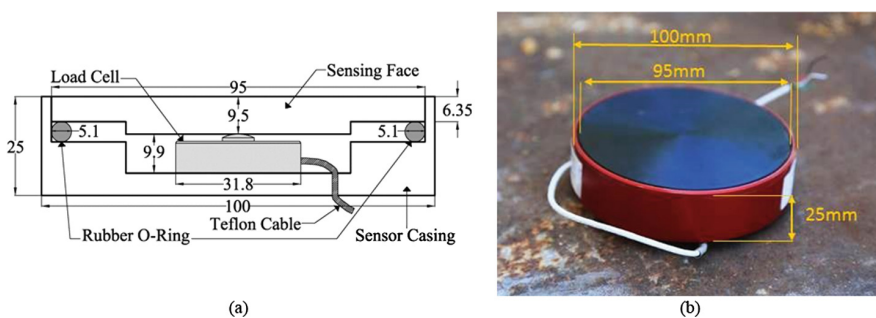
Soil pressure sensor: (a) cross-section A-A schematic view (in mm), and (b) photograph of complete pressure cell
